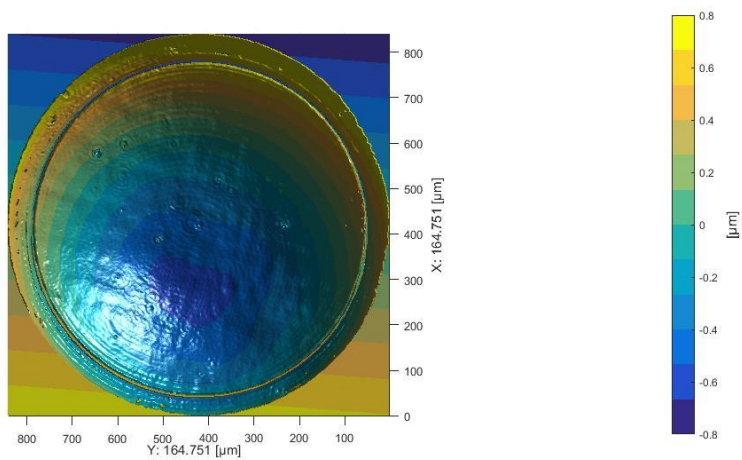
Shape of the NiP coated stainless steel insert before molding
